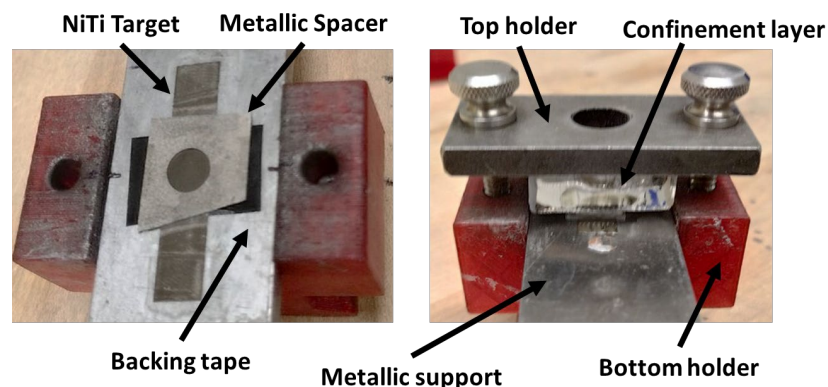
Images of the experimental setup for the laser impact welding tests.
